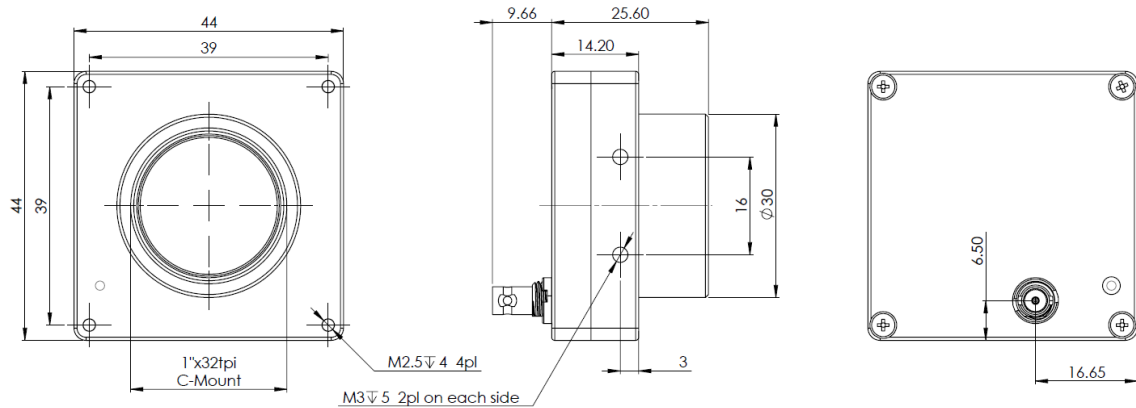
Iron CoaXPress w/o pane-tilt correction mechanical dimensions
